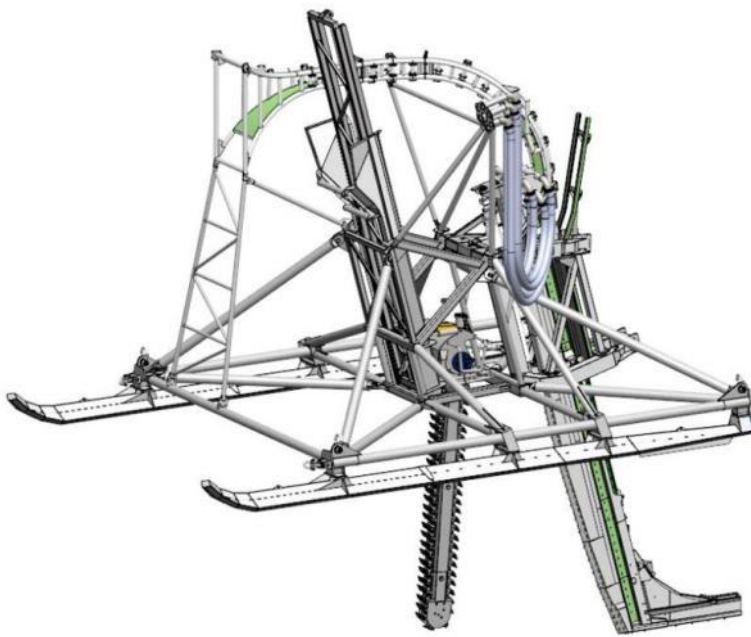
BSS3 jet sledge trencher with a mounted chain cutter in front of the cable stinger
